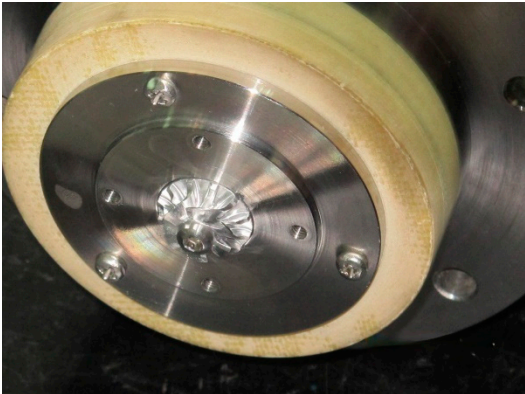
The rotor shaft and impeller of the helium turbine expander.
